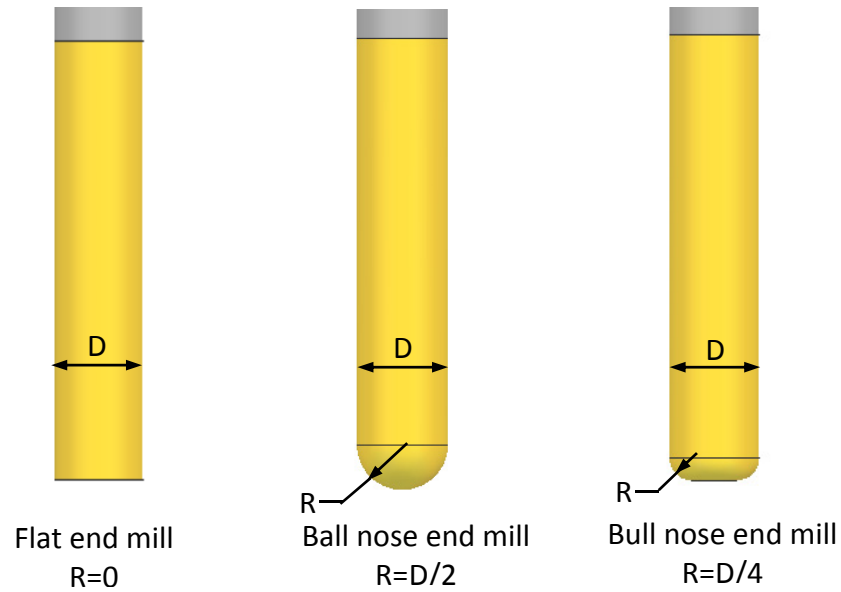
Three prominent shapes of end mill tool (Engin et al. 2001)
